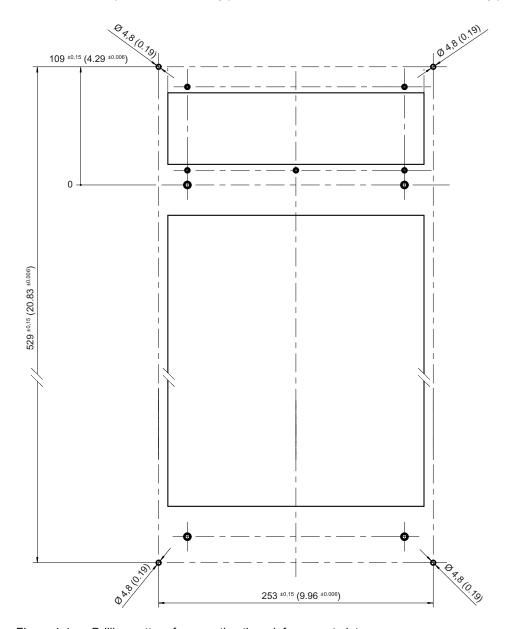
Drilling pattern for mounting the reinforcement plates
